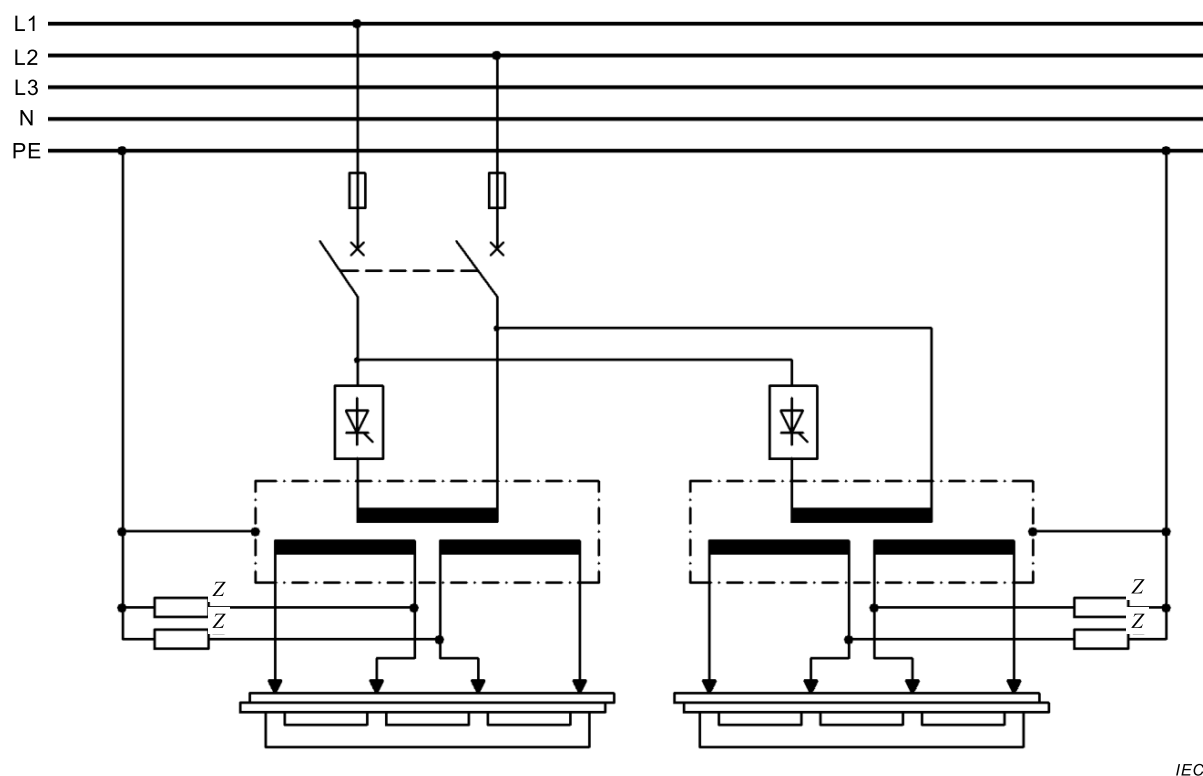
Example of protective conductor connected to welding circuits through impedances
